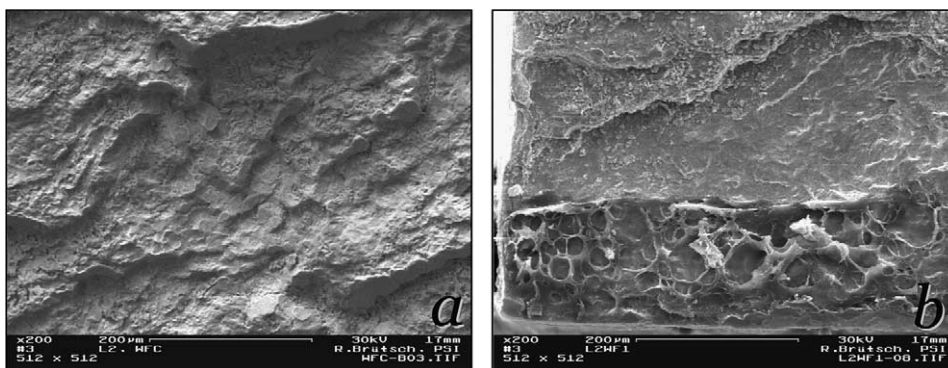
Micrographs showing (a) brittle fracture in the central part and (b) ductile fracture in an area near the outer surface and close to the upper end of the crack.
